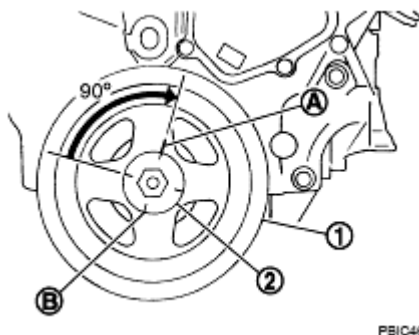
Identifying Crankshaft Pulley Bolt Tighten 90 Degrees
